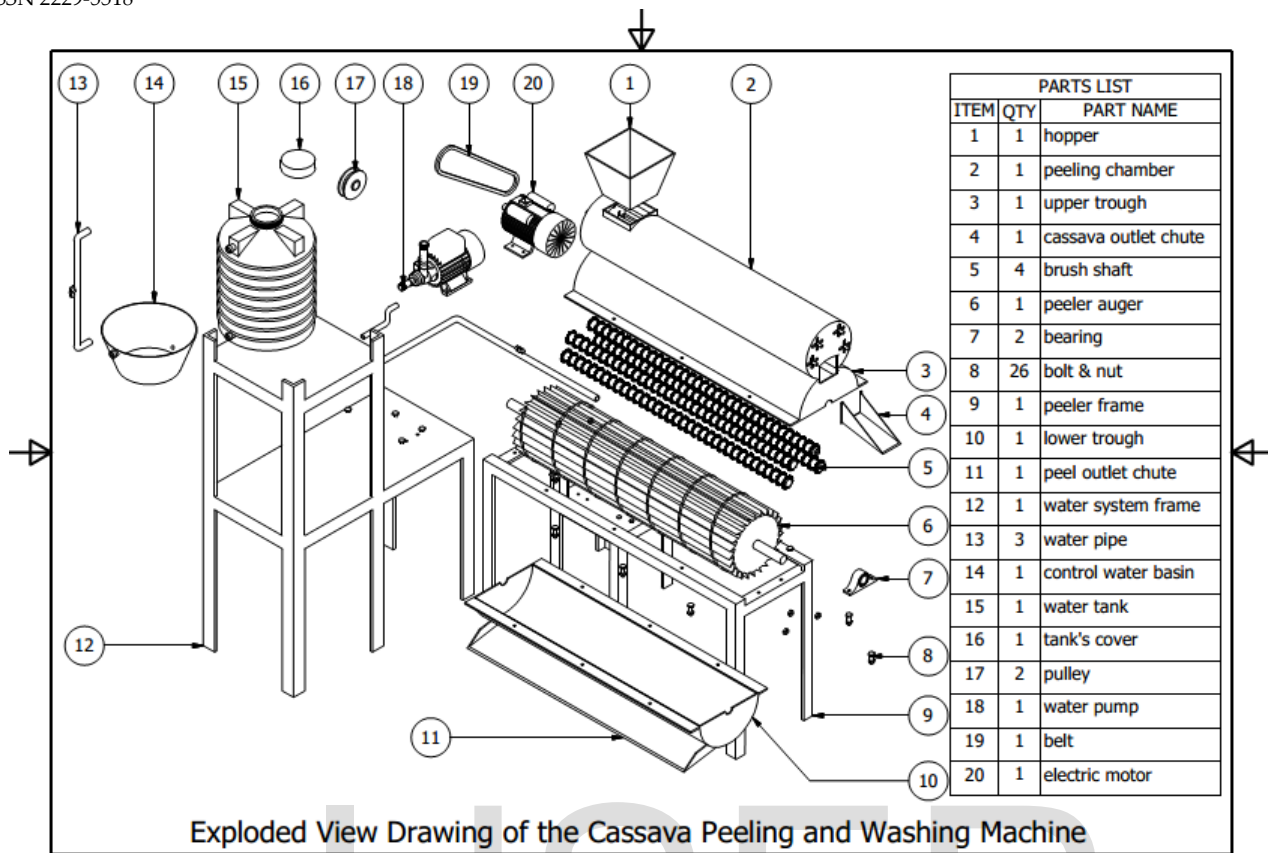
Exploded View of the Cassava Peeling and Washing Machine
